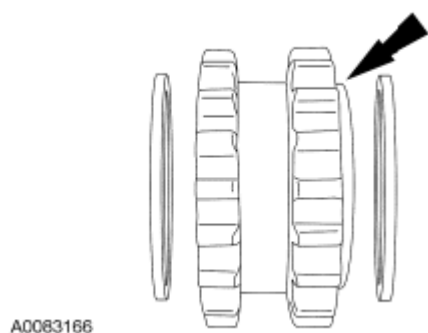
Locating Crankshaft Sprocket & Diamond Washers
